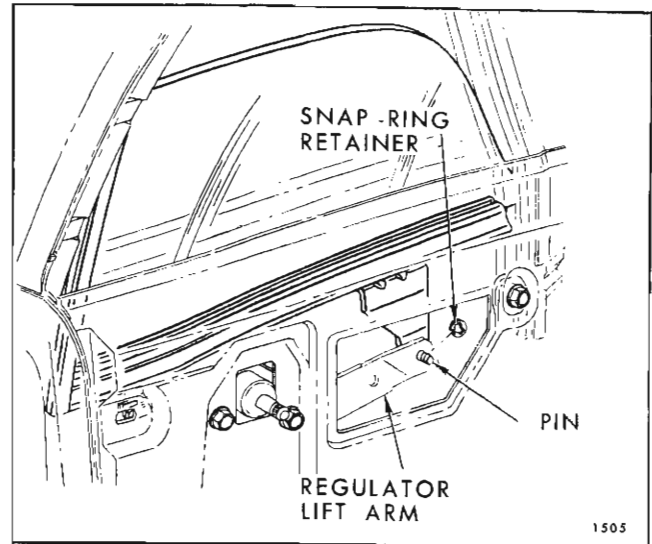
E18—Rear Quarter Window Attachment - "11" Styles
